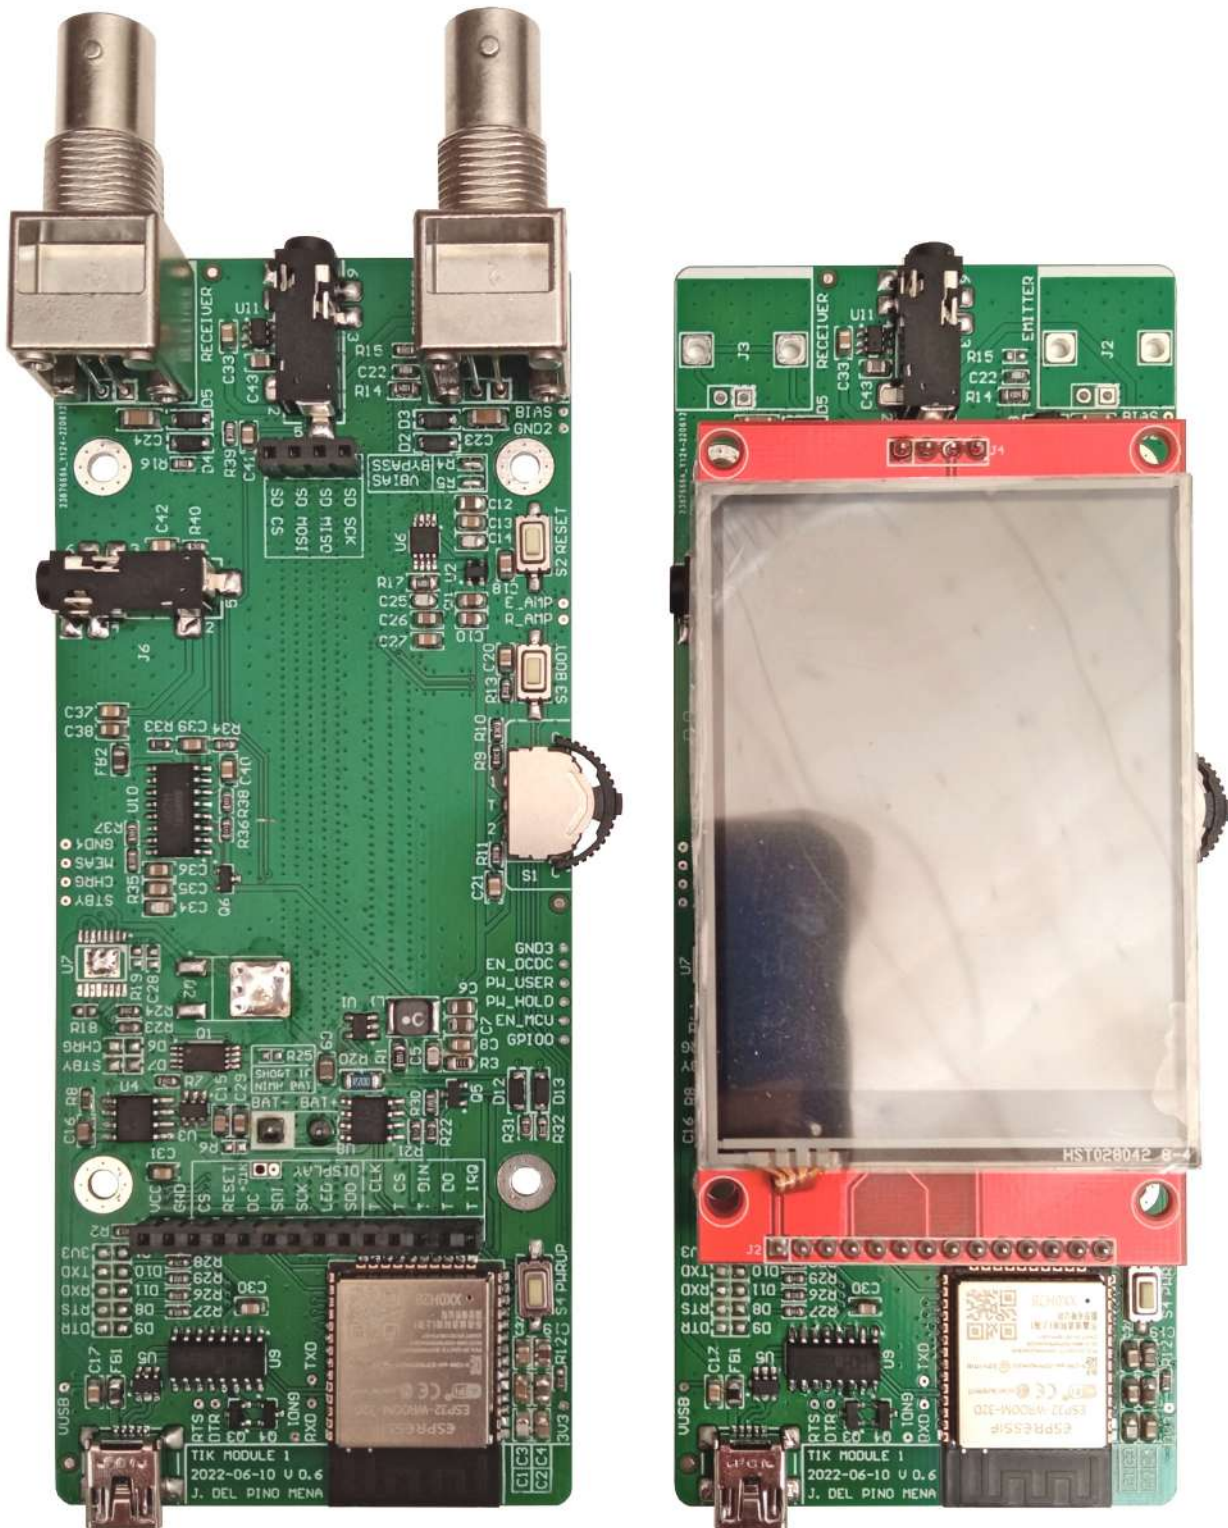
PCBs soldered with corrected solder defects. Version with and without BNCs and the LCD.
